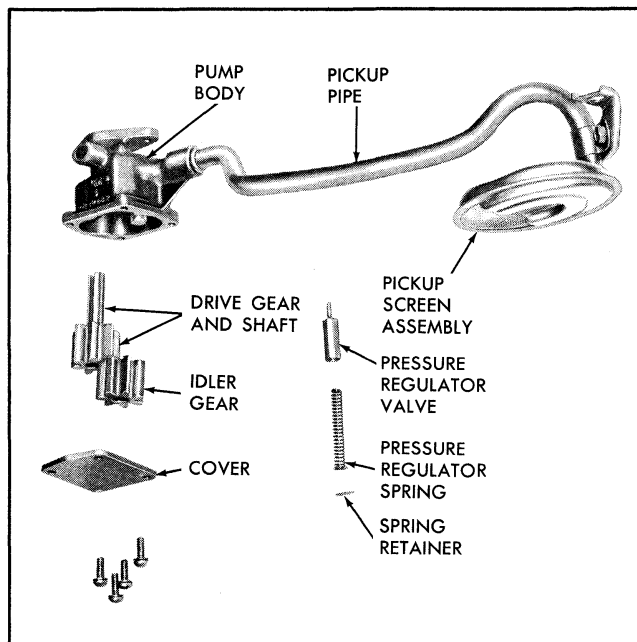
A-9 6 Cyl. Oil Pump Assembly
